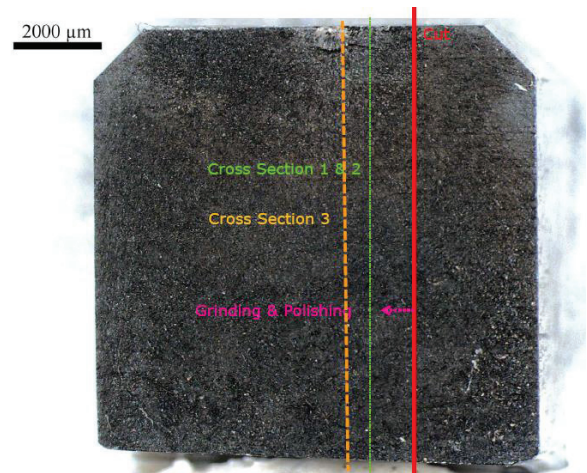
Stereomicroscope image of the fracture surface of ring B1
